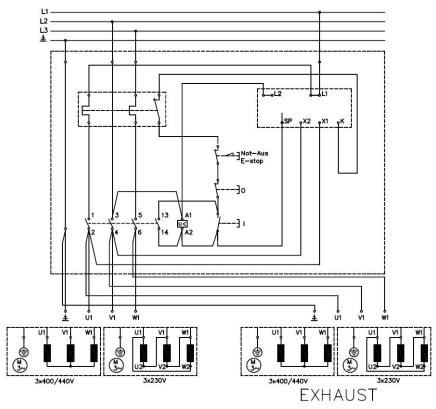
Diagram of belt grinder with brake and exhaustmotor.
